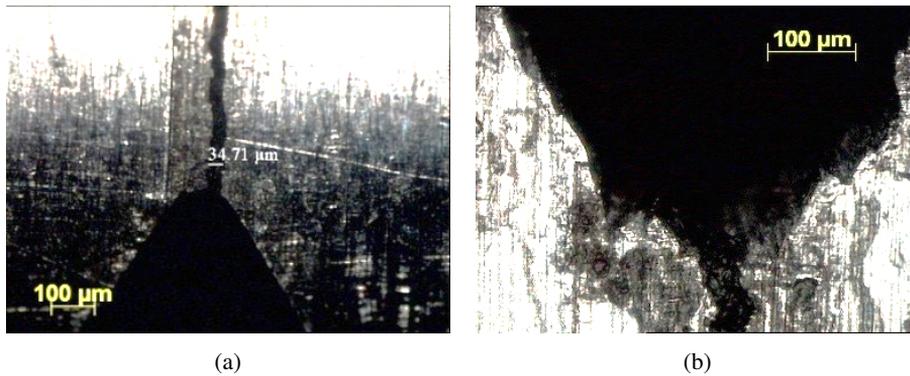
Optical microscope pictures showing a progressive fatigue crack and the notch: (a) the crack growth from V-notch, (b) the V-notch
